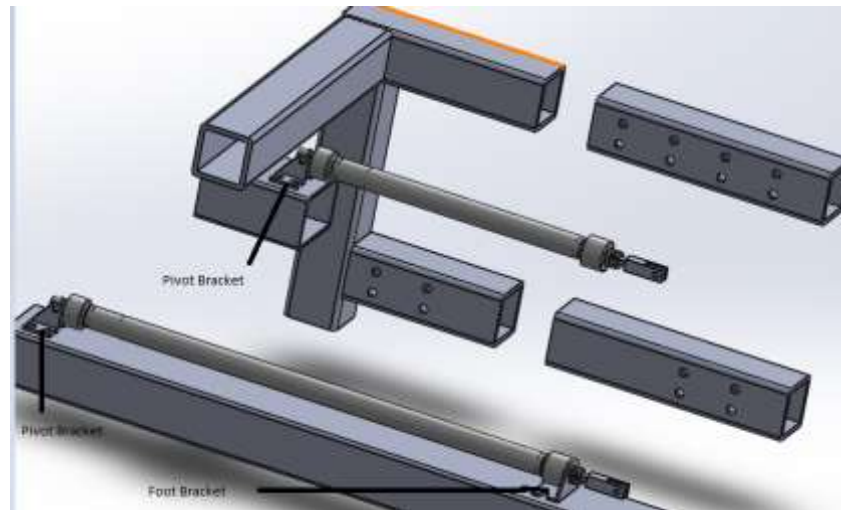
Small And Large Cylinders Mounted to Pivot Bracket and Large Cylinder Mounted To Foot Bracket
